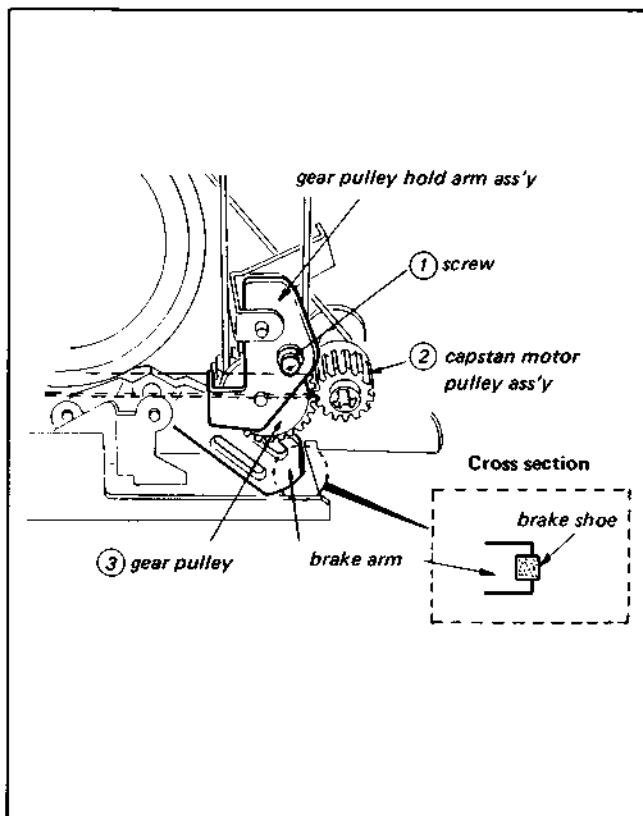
Position adjustment of gear pulley hold arm assembly
